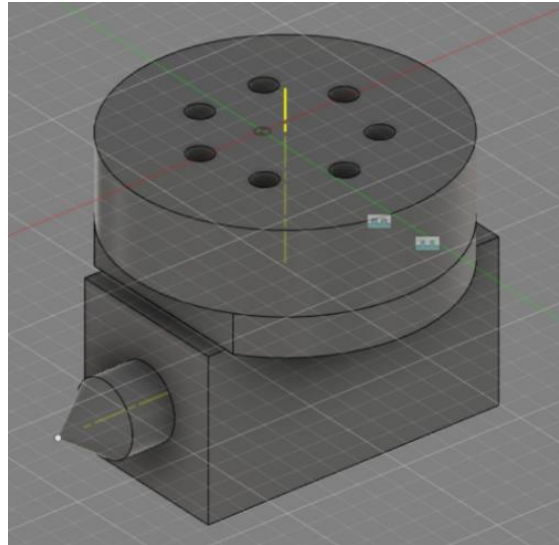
Adapter flange and the laser with a model focal distance CAD
